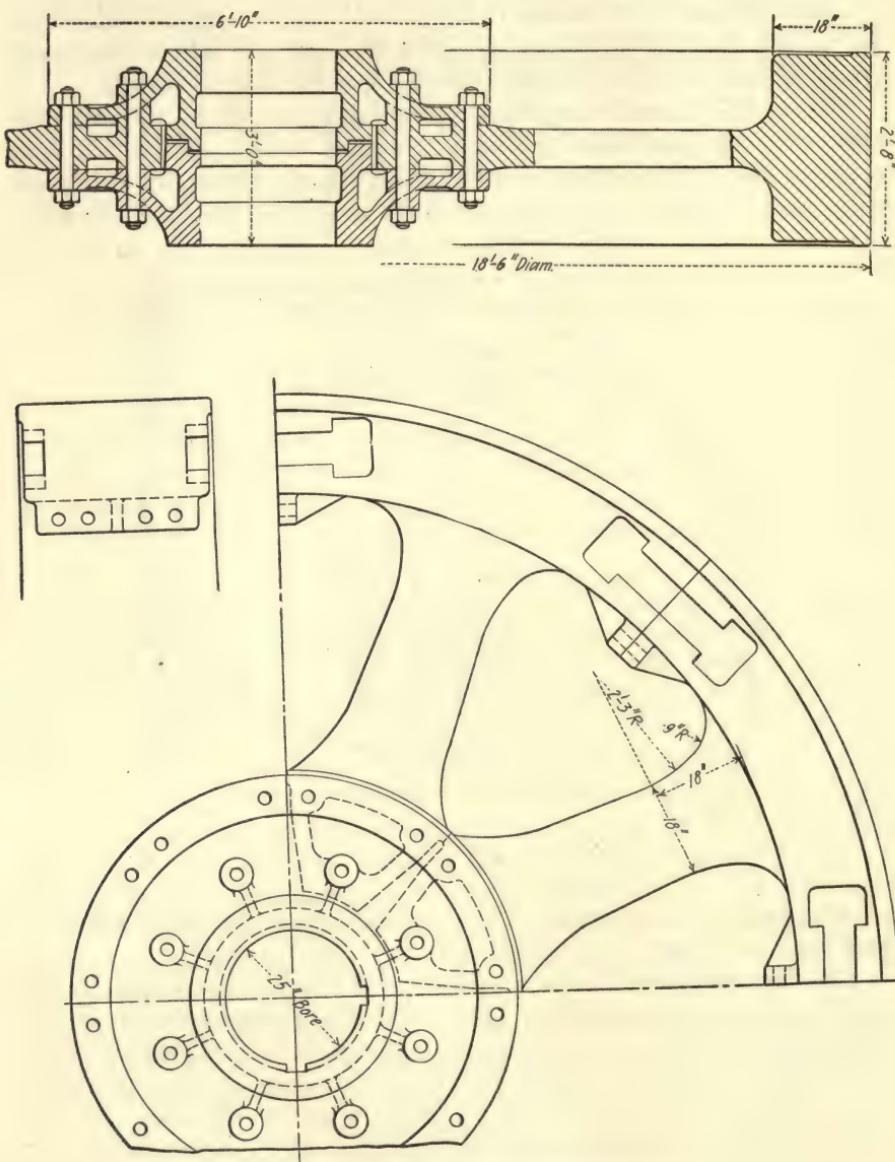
Bass-Corliss rolling-mill engine wheel.
